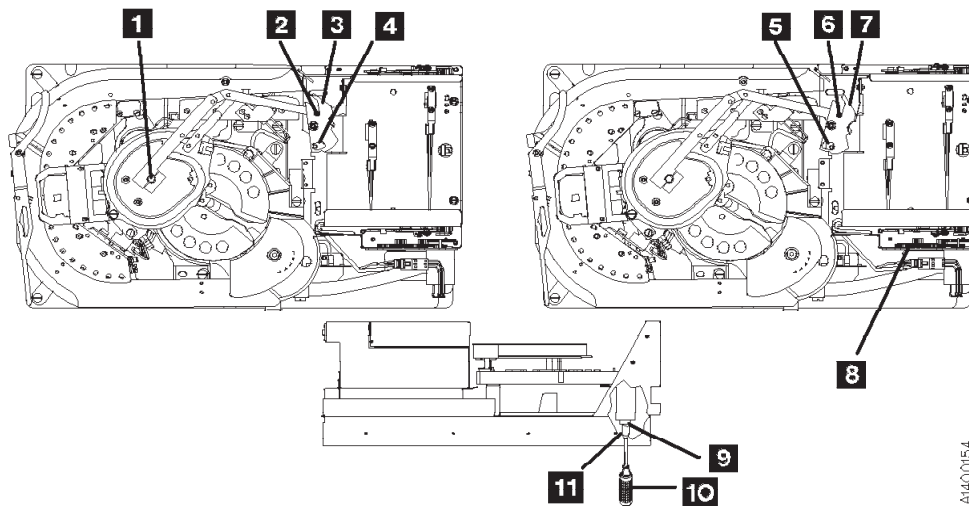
Leader Block and Threader Pin at Loader Assembly
